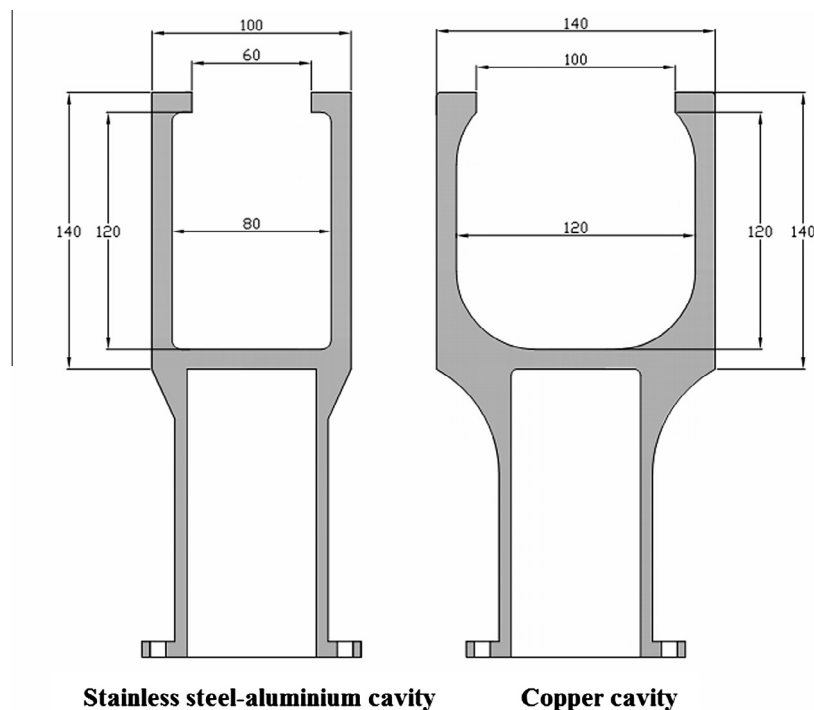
The dimensions of the cavities made of copper and aluminium or stainless.
